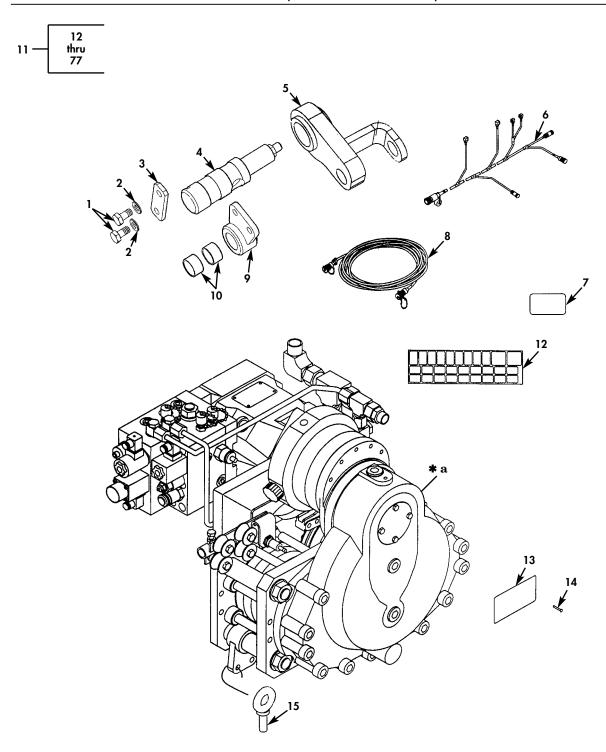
Winch Mounting Brackets, Pulleys, and Related Parts.
